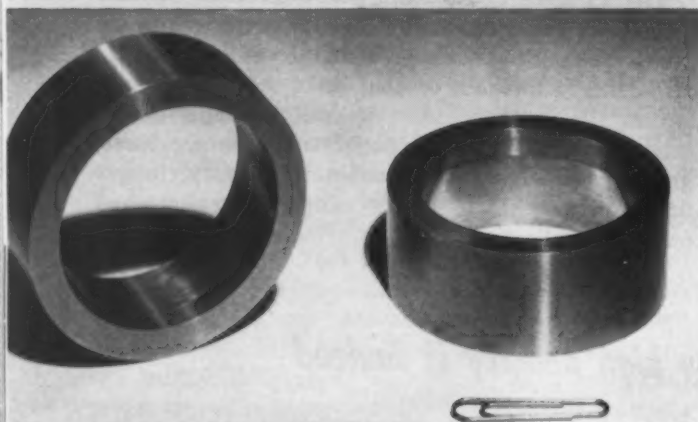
Heavy-alloy gyroscope rotor with 0.00075-inch step machined on ID
